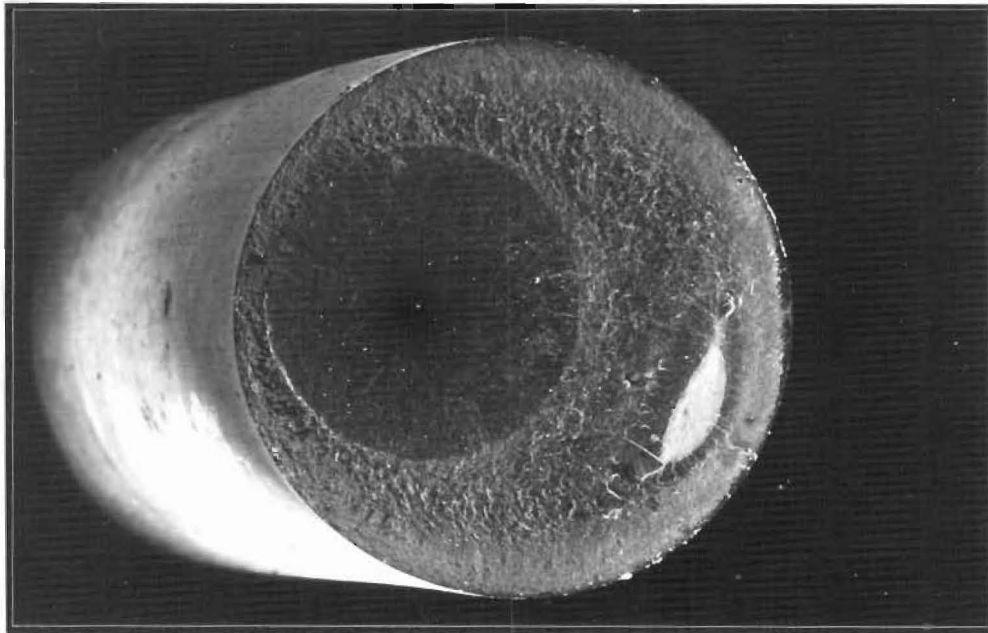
Typical fracture surface for specimens 10A.
